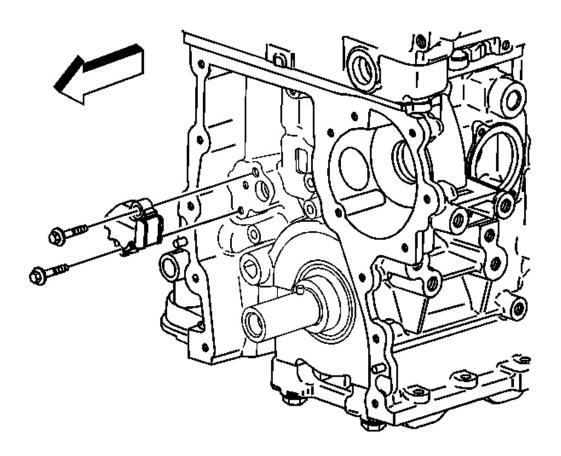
View Of Timing Chain Tensioner Courtesy of GENERAL MOTORS CORP.
